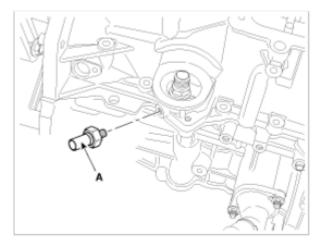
Identifying Knock Sensor And Oil Filter Courtesy of HYUNDAI MOTOR AMERICA
